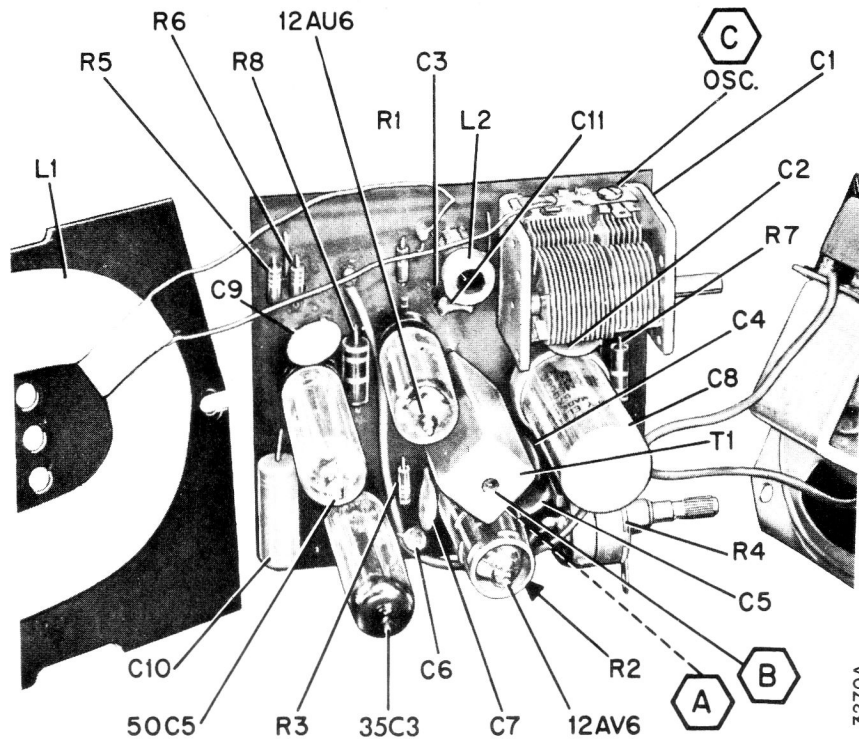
Top View of Chassis Showing Location of Components and Alignment Points.
